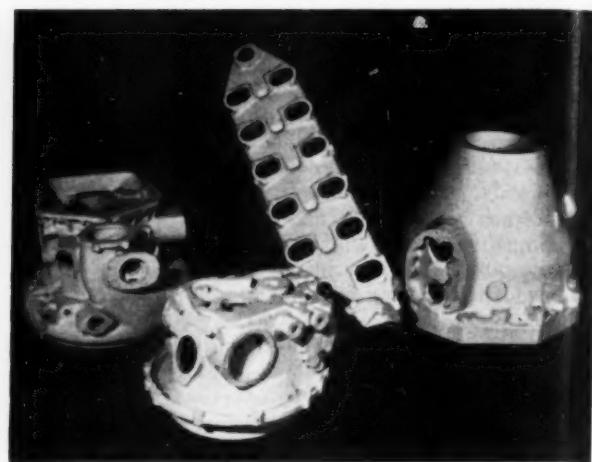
MAGNESIUM AIRCRAFT-ENGINE CASTINGS
